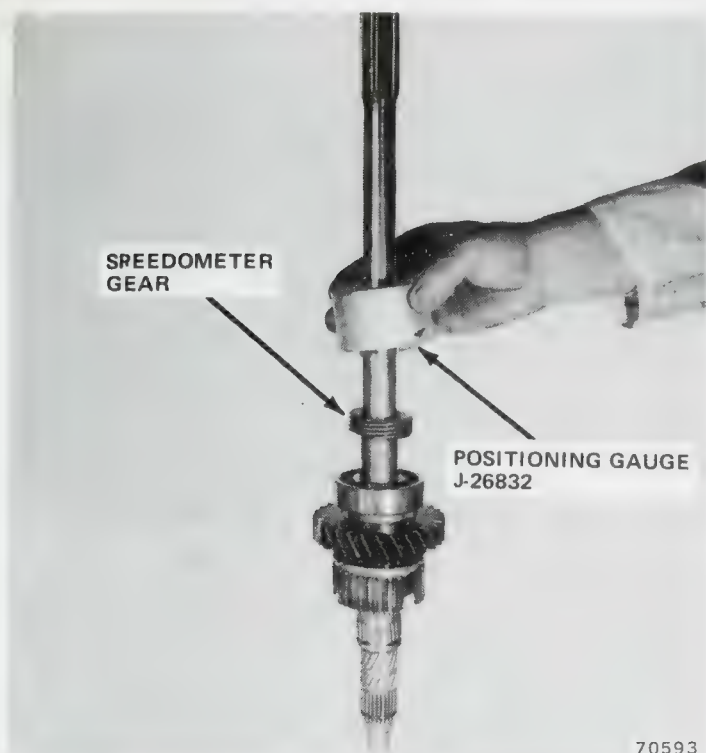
B-67 Speedometer Gear and Positioning Gauge Installation
